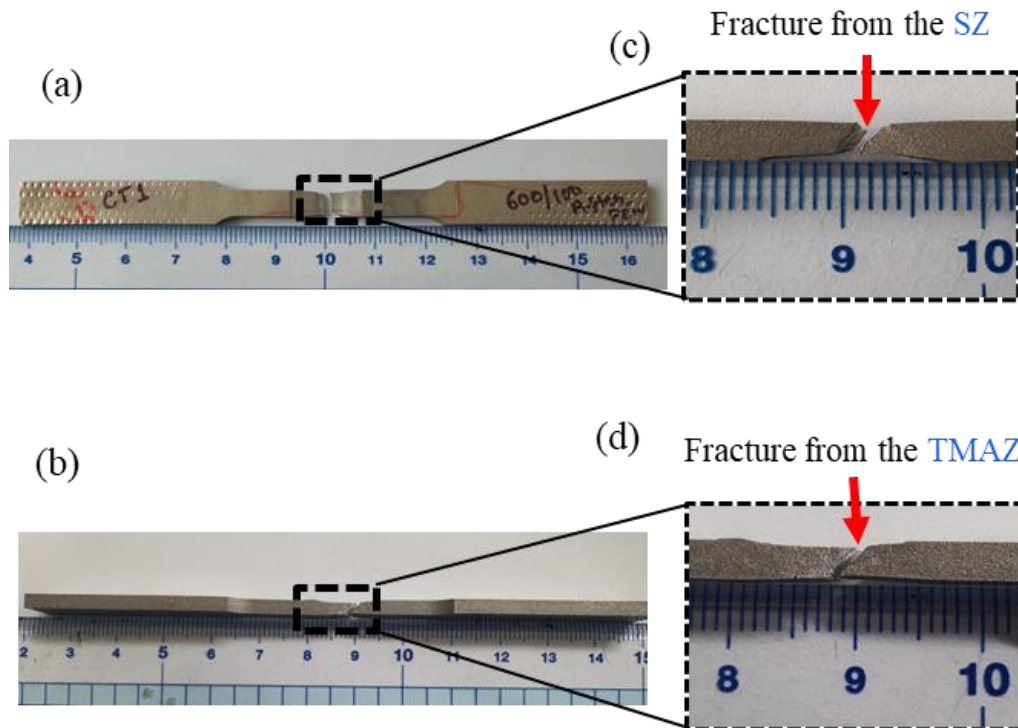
The broke tensile specimens fractured visual position in (a) the FSW and (b) the PWHT joints; (c, d) magnified views of the rupture area of (a, b).
